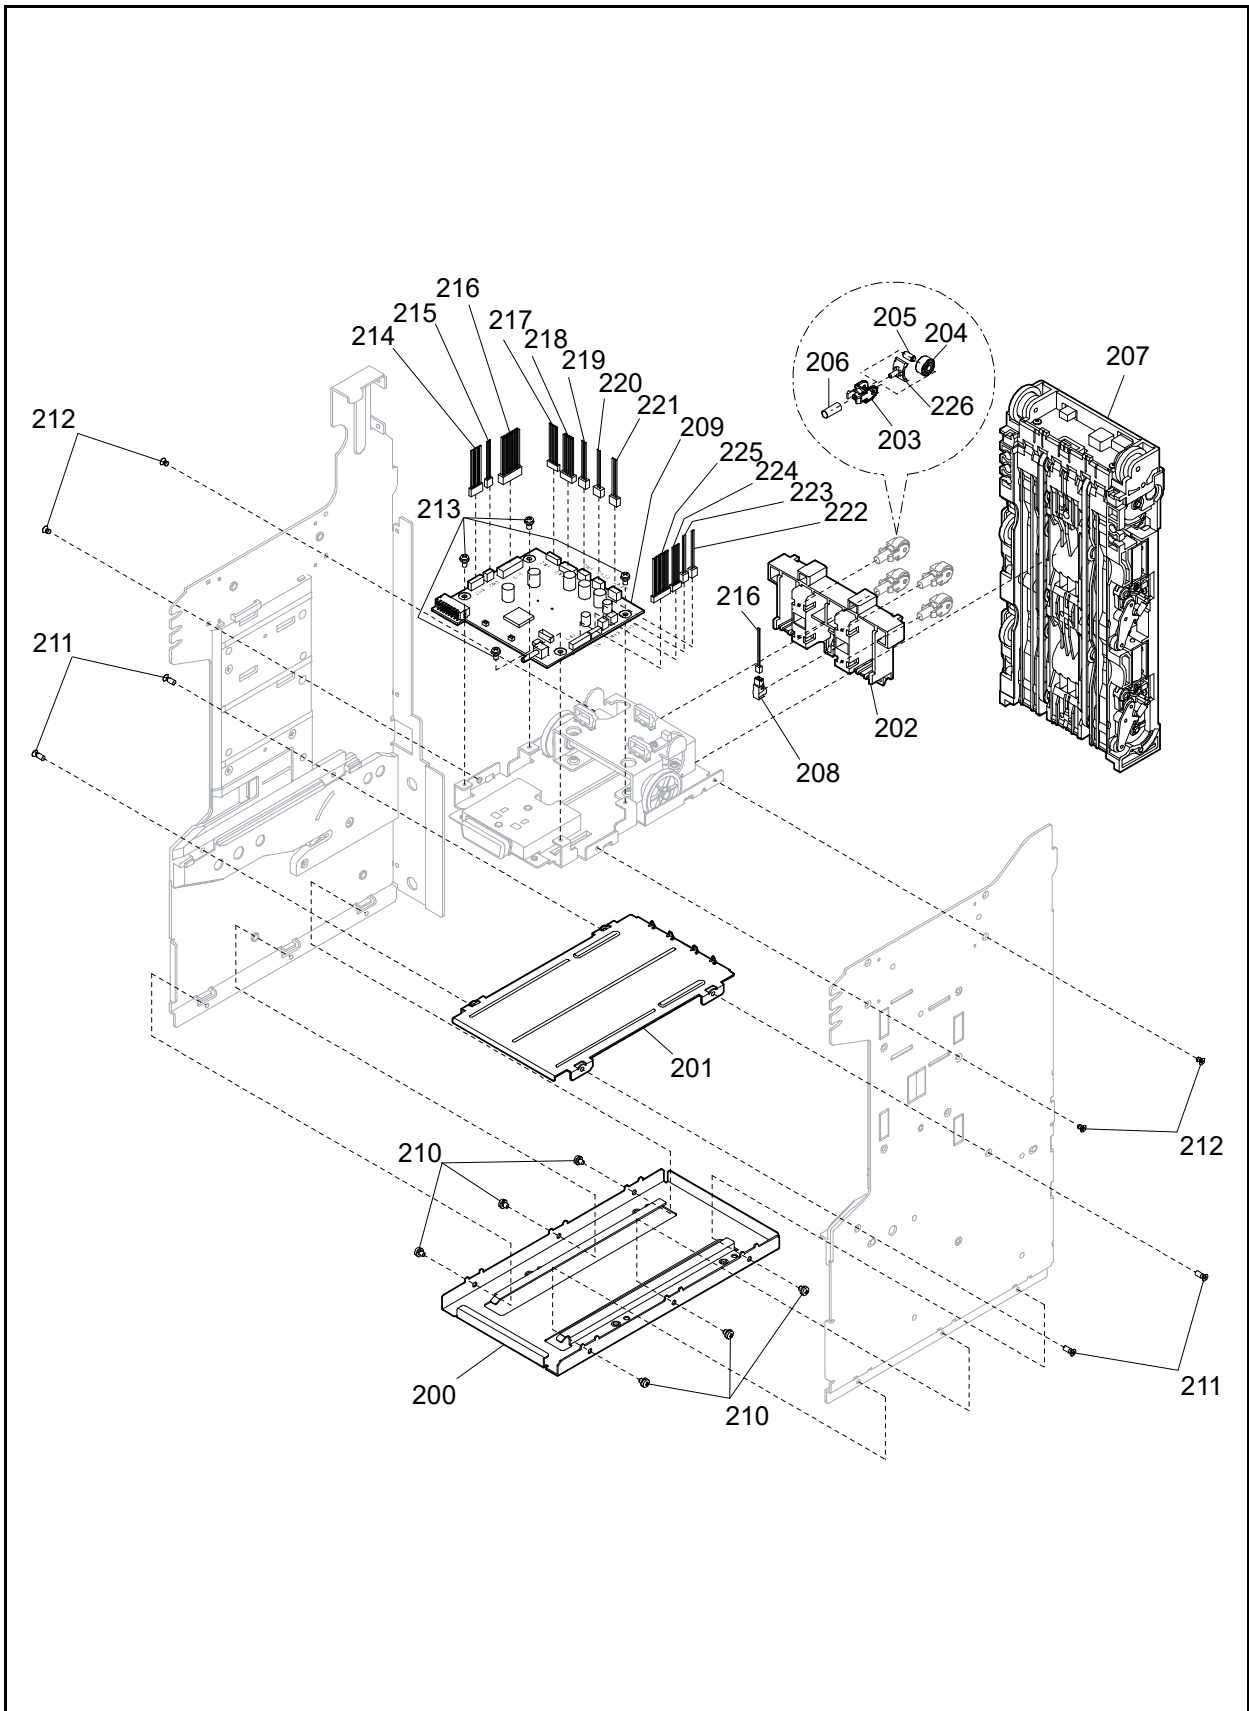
iPRO-RC Frame Unit 2 Exploded View
